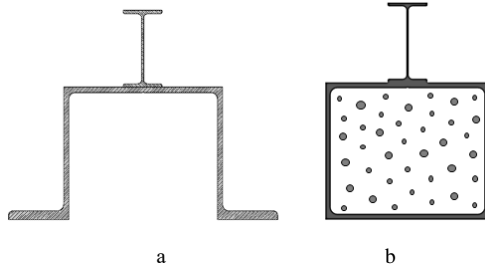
Section of the center sill with filler a – standard; b – with filler
